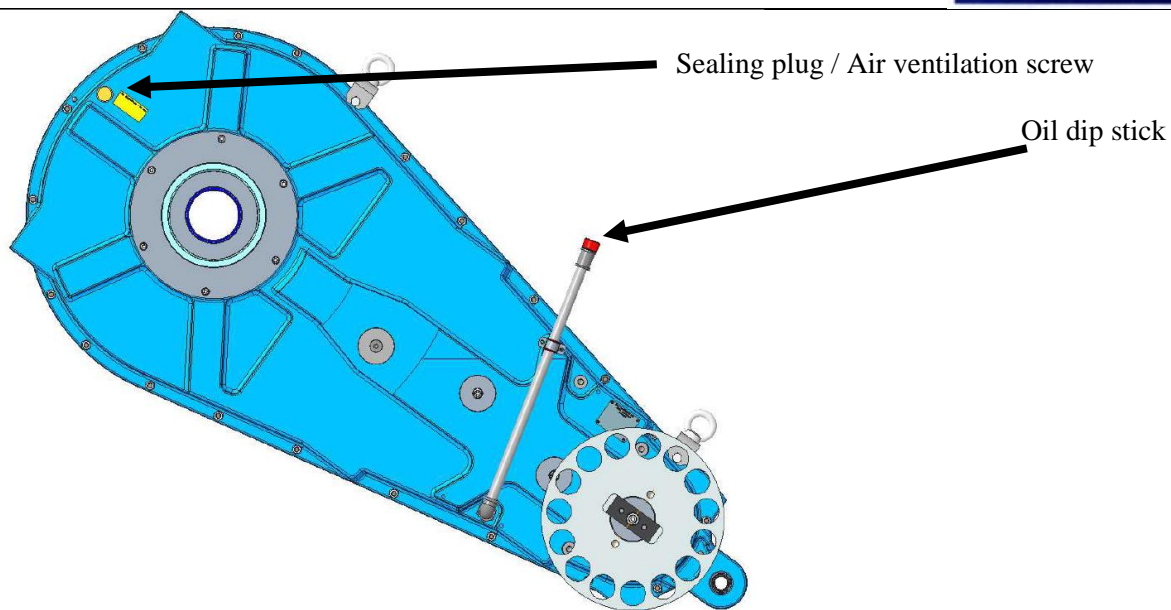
Intermediate gear, oil dip stick and air vent screw, angular mounting position approx. 36°
